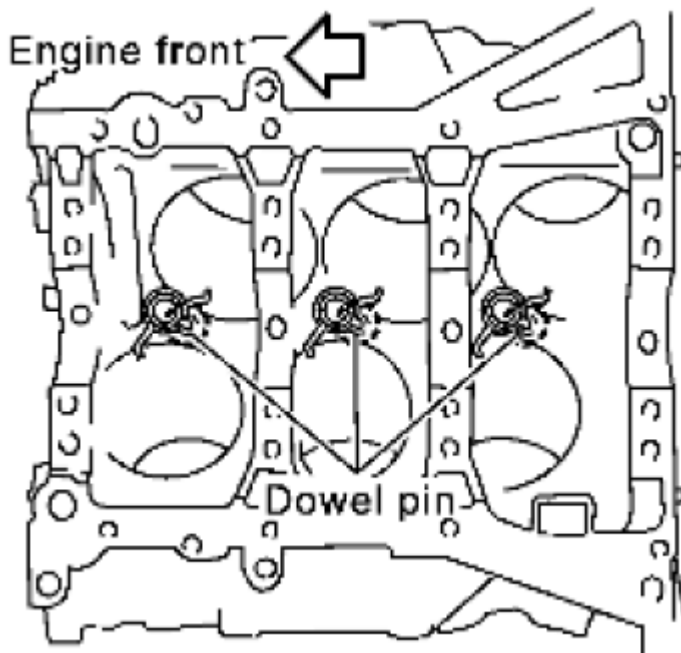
Inserting Oil Jet Dowel Pin Into Cylinder Block Dowel Pin Hole
